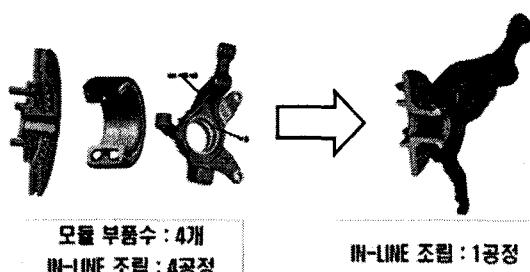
Knuckle and wheel hub bearing integration for axle module
